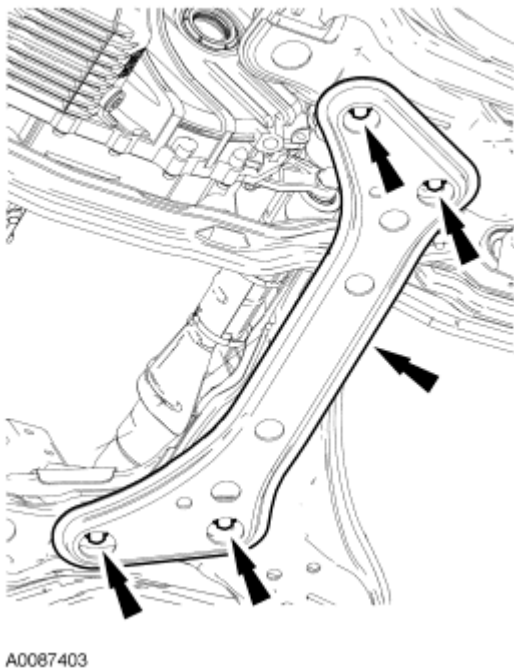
Identifying Lateral Support Crossmember And Bolts
